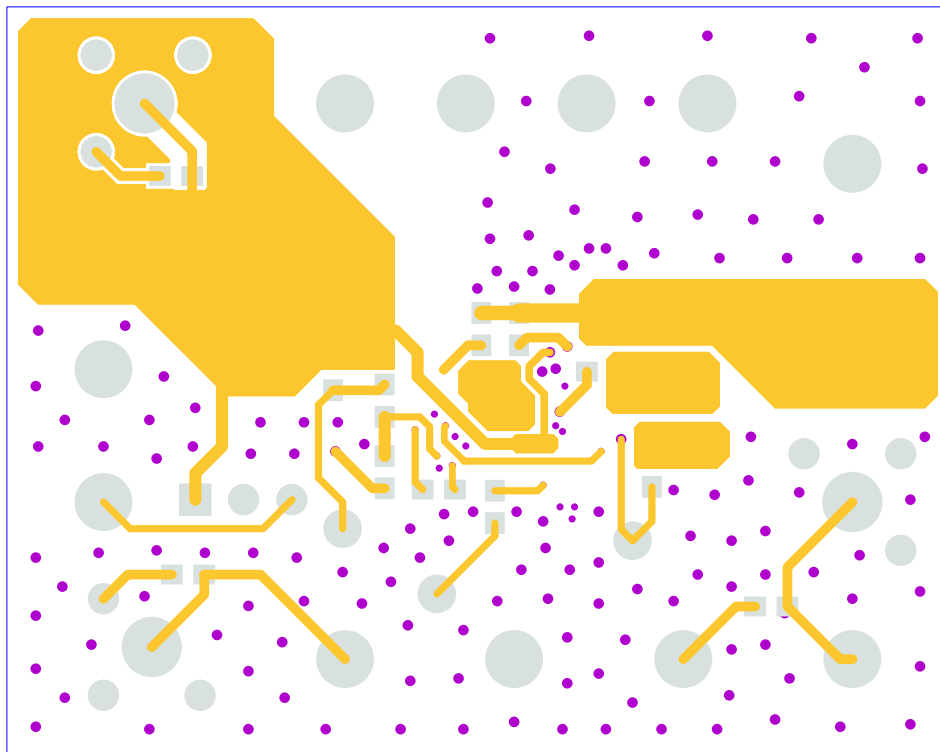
BOTTOM LAYER ETCH (MIRRORED)
